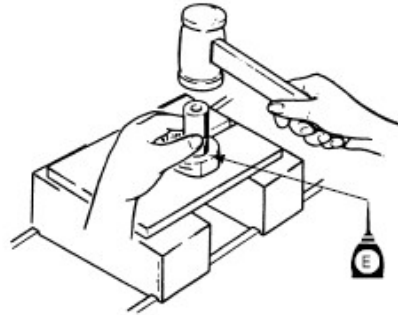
Bearing inner race attachment ② : 90890-06644
